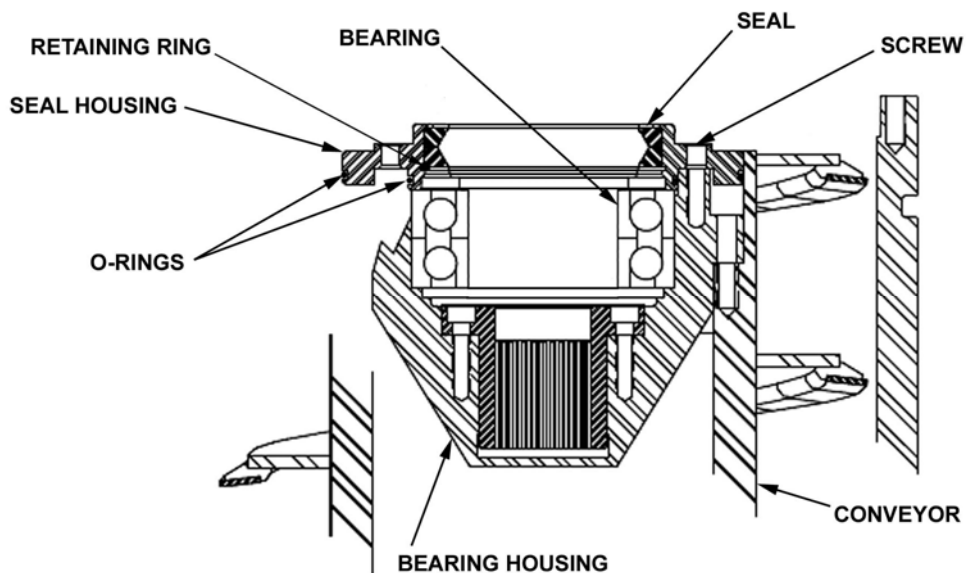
Liquid End Conveyor Thrust Bearings Installation
